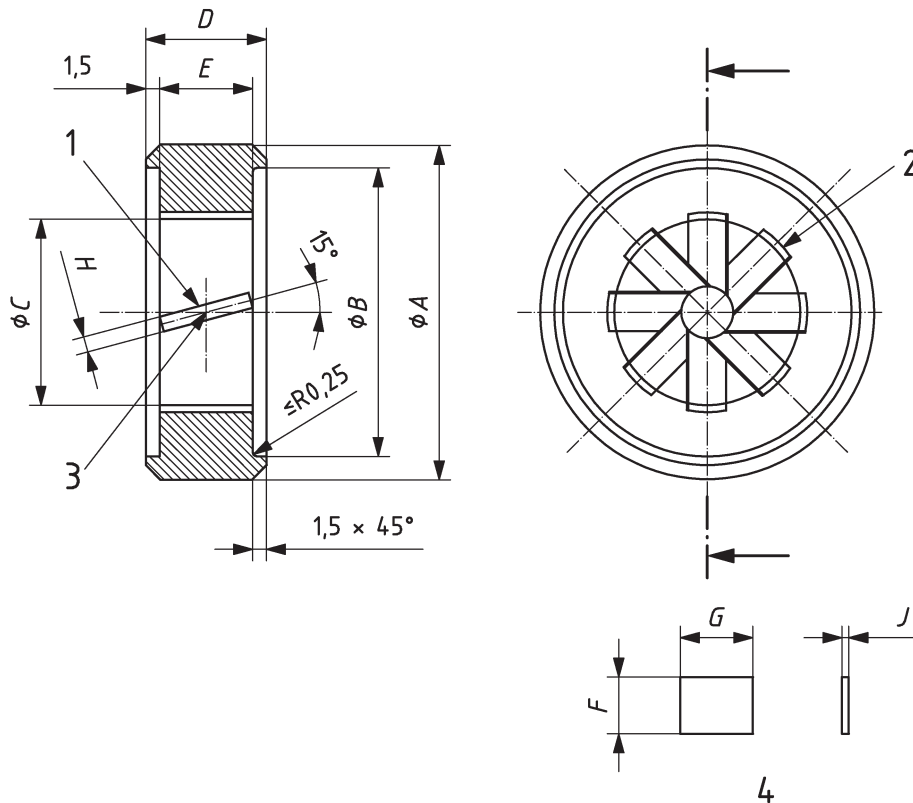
Body of a threaded type disturbance generator, with dimensions as set out in Table B.2
